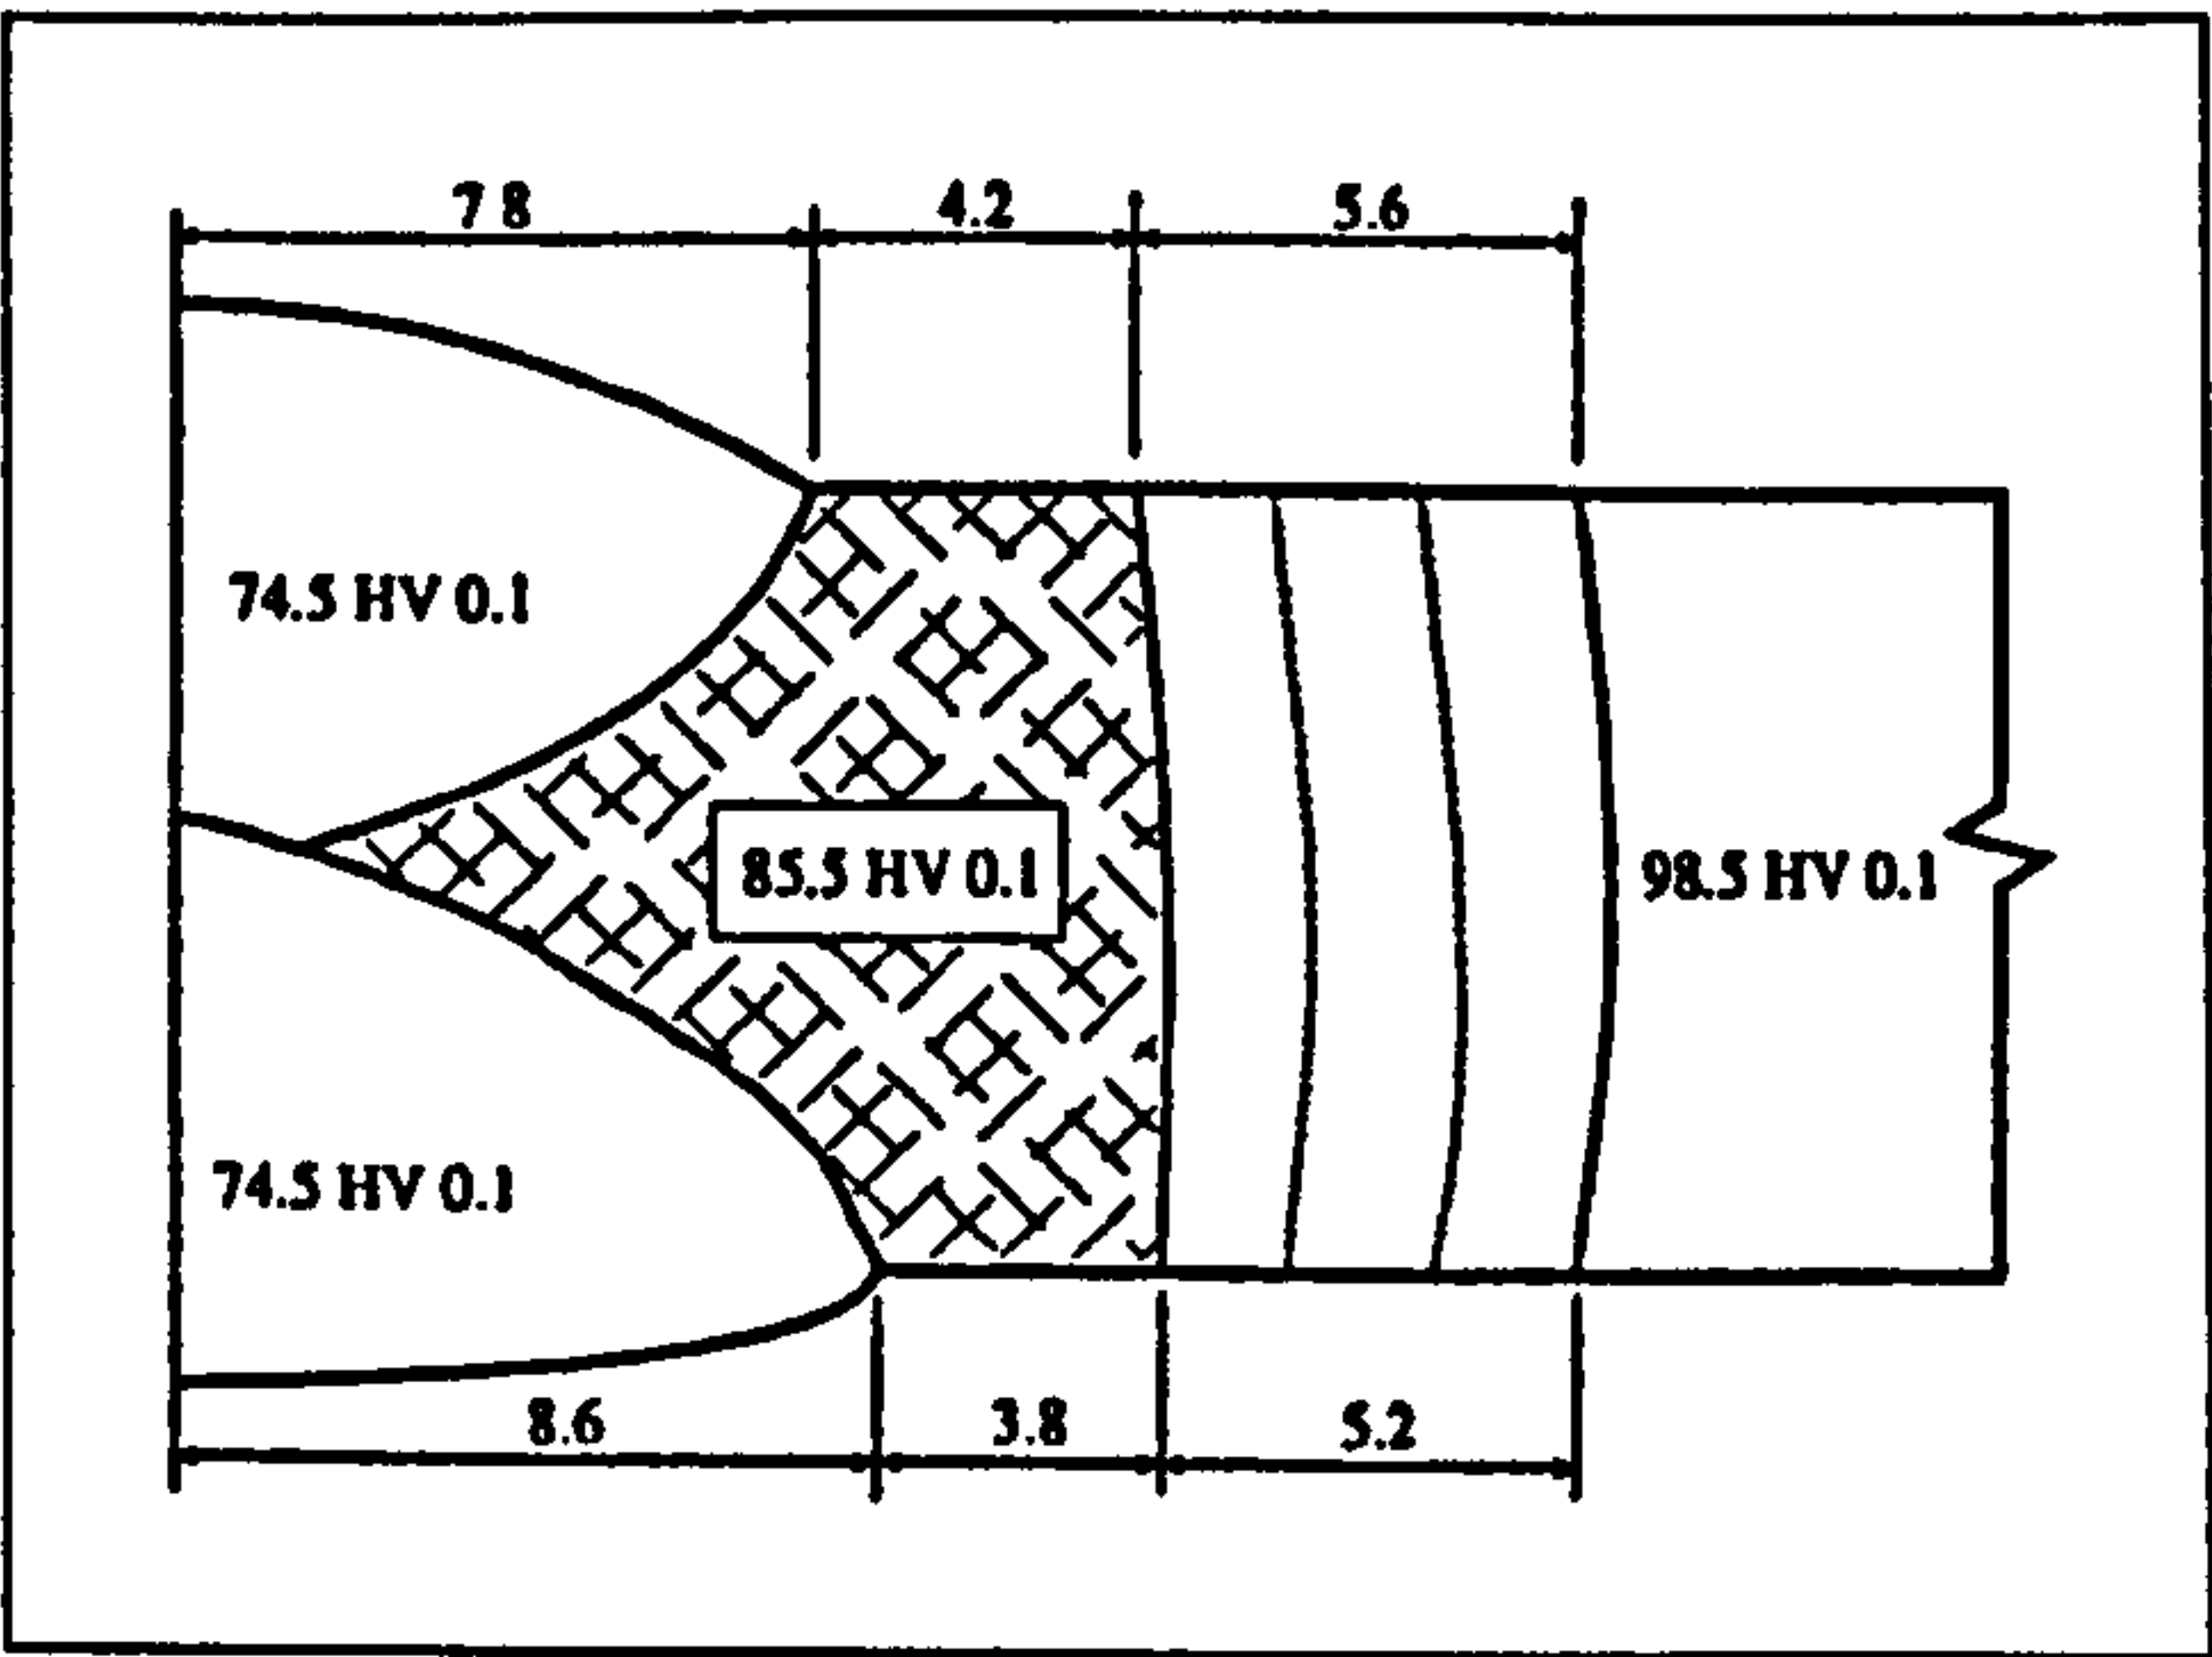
Microhardness profile of the weld and HAZ in a MIG butt weld in AA 5383-H116.
